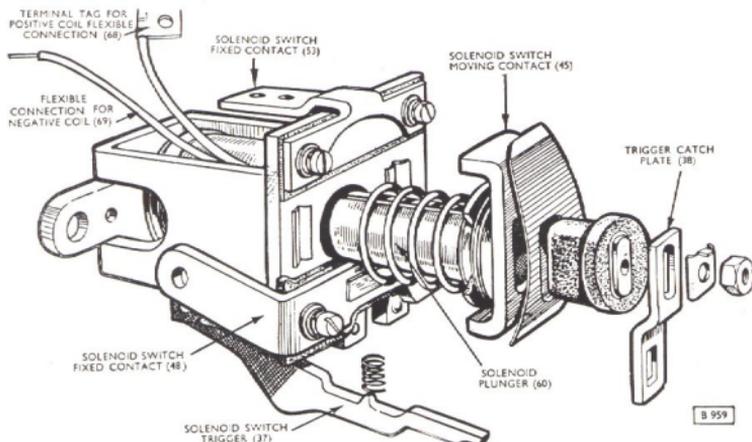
Exploded view of starter motor solenoid switch (C.A.V.)
